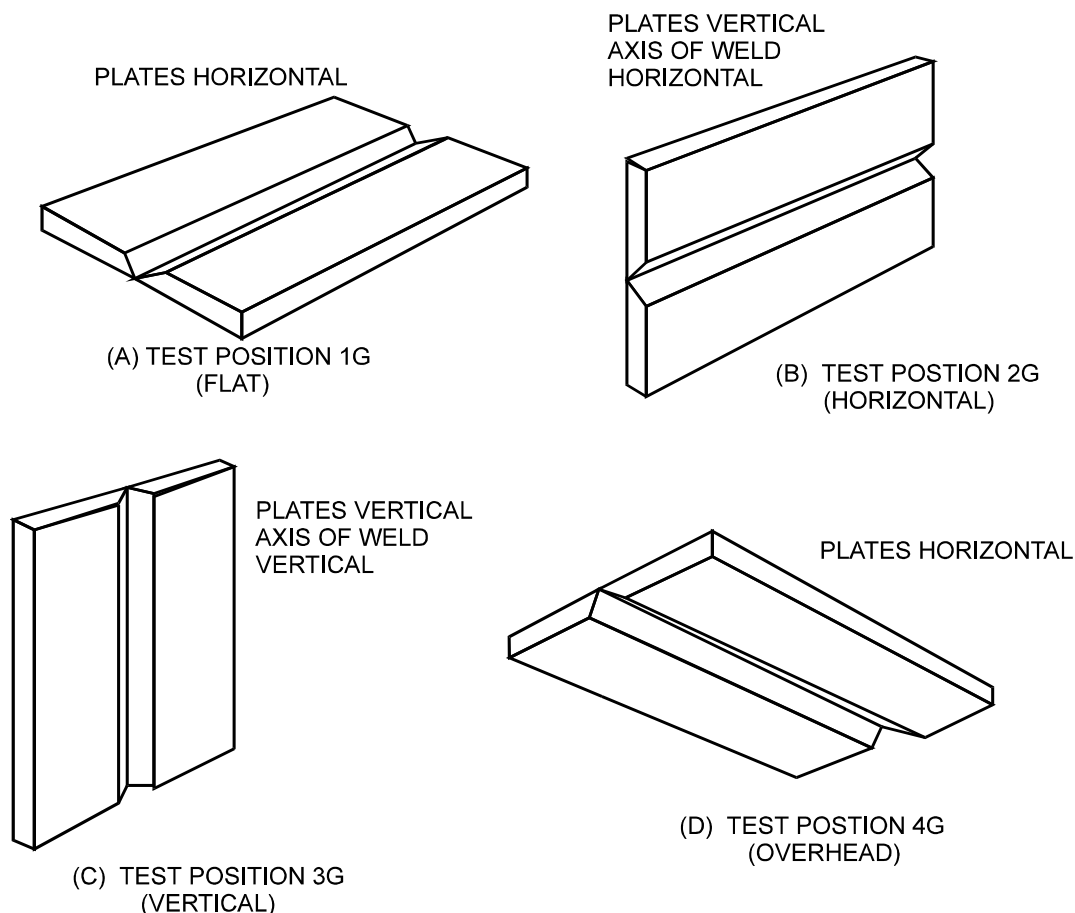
Position of Test Plates for Groove Welds (see 5.6.1.1)
